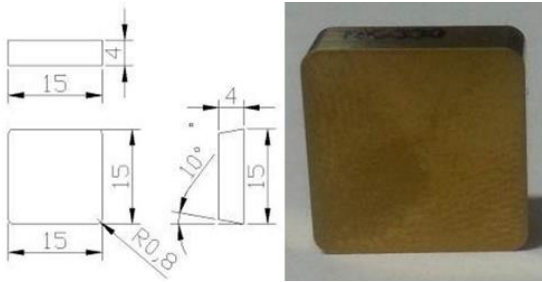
Dimensions and geometry of cutting tool (Sintered carbide – P20 +TiN)
